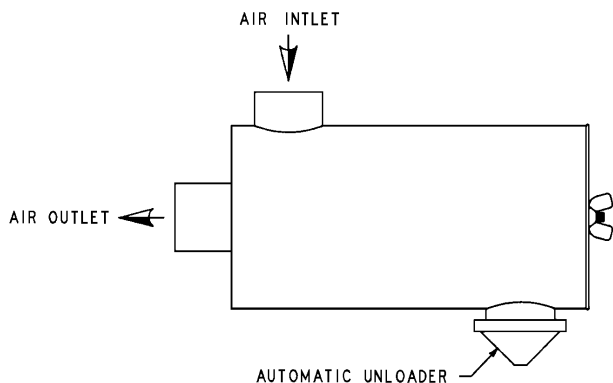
HEAVY DUTY AIR FILTER (STANDARD)
